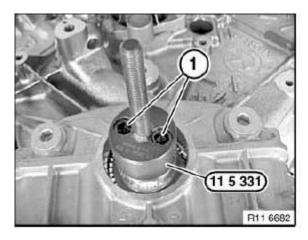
Identifying Special Tool 11 5 331 Courtesy of BMW OF NORTH AMERICA, INC.
